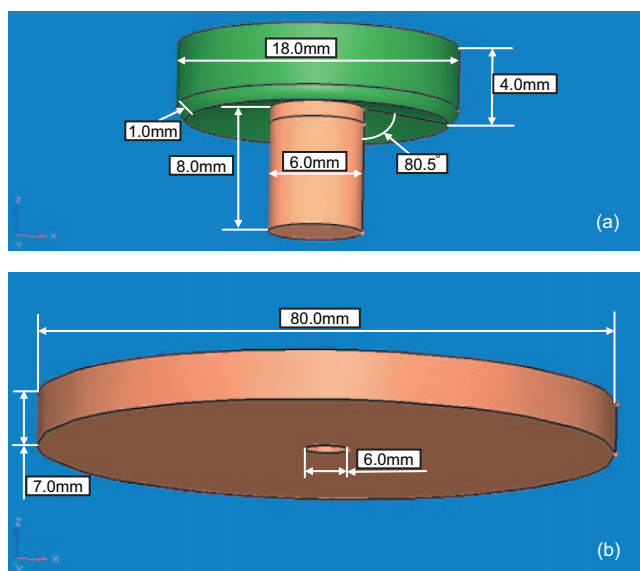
Geometrical models with dimensions for (a) the FSW tool and (b) the FSW workpiece
